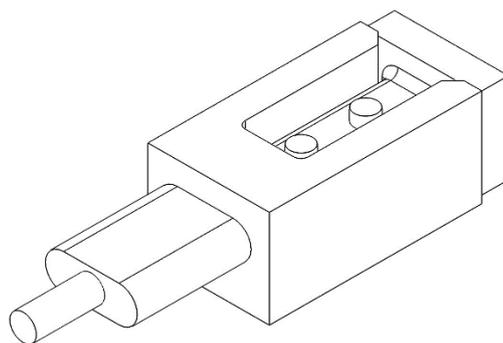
Wrenching Strength Test with Cable in Fixture
